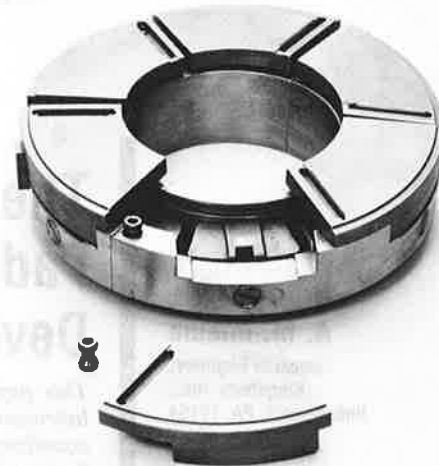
Leading-edge-groove bearing showing the oil feed tube
